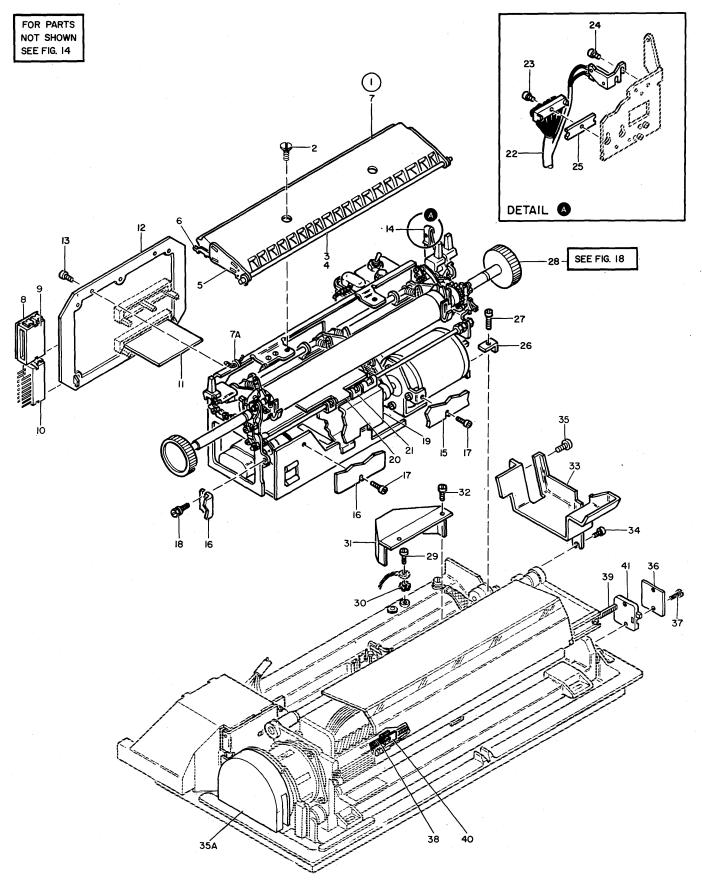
PRINTER FINAL ASSEMBLY. SHEET 1 OF 2. INDEX NOS. 1-41.
